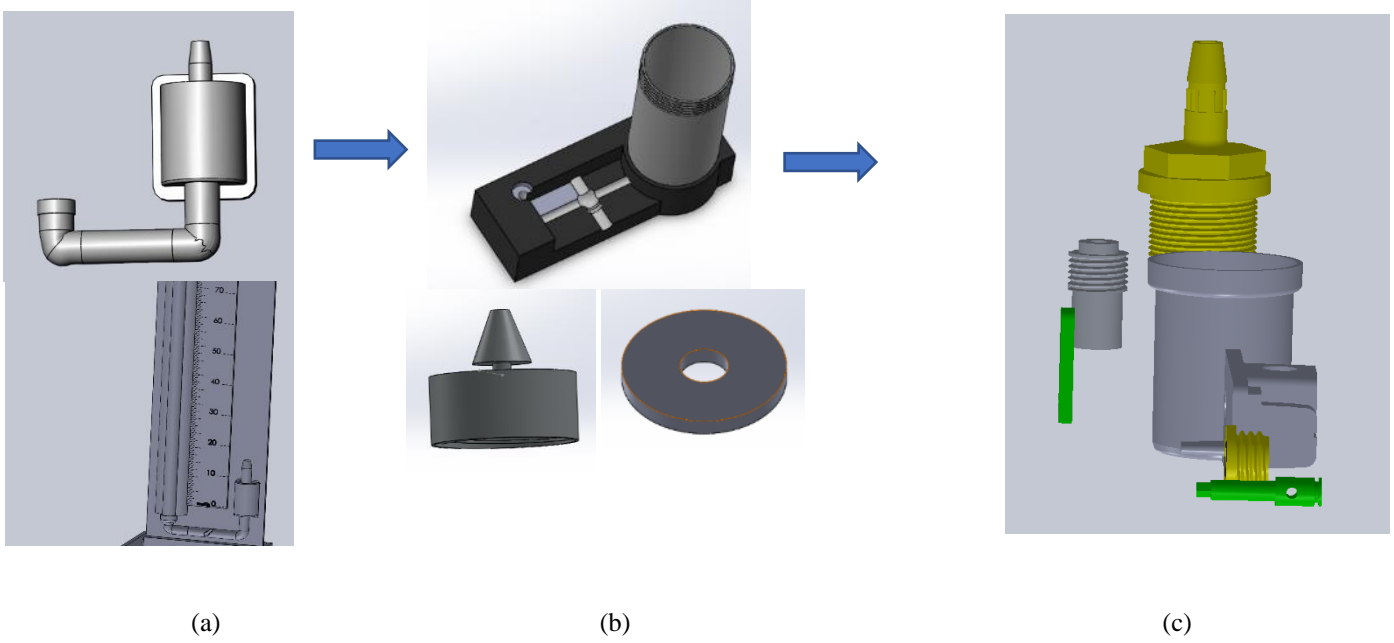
Various transitions in tank design (a), (b) Initial CAD designs, (c) Final CAD design.
